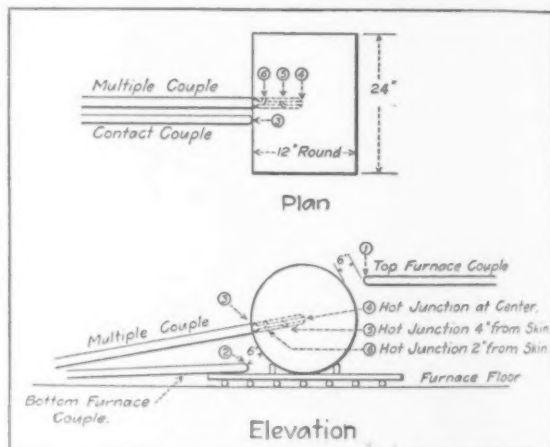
Thermocouple Arrangement for Specimen 12 In. in Diameter
